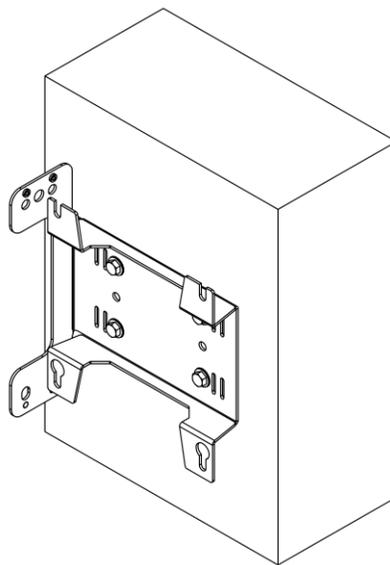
depicts an example installation into a solid concrete wall using 1-1/2-inch long, 5/16-inch thread corrosion-resistant flat washers fastened into 5/16-inch screw size, 1-3/4" long die cast zinc Lag Shields installed into a concrete wall. The hardware is not included with the product.
